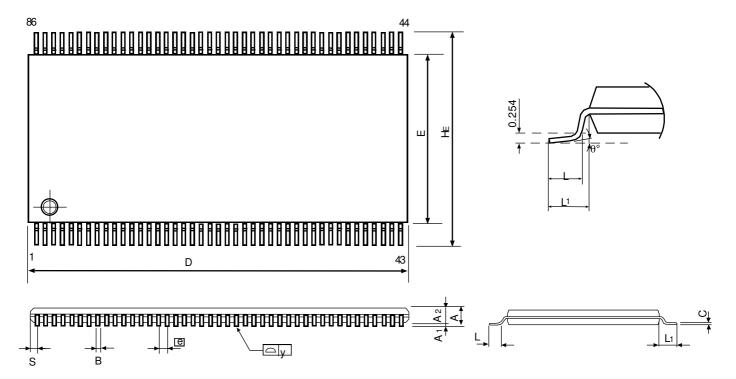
86 Pin TSOP II Package Outline Drawing Information
